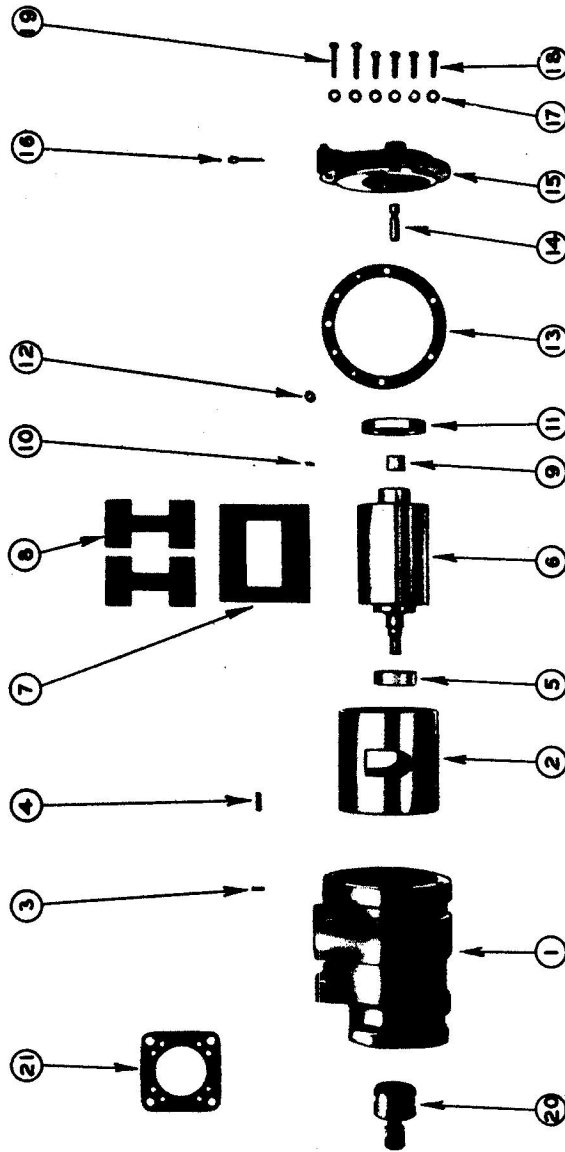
PARTS PHOTO FOR 207 SERIES
